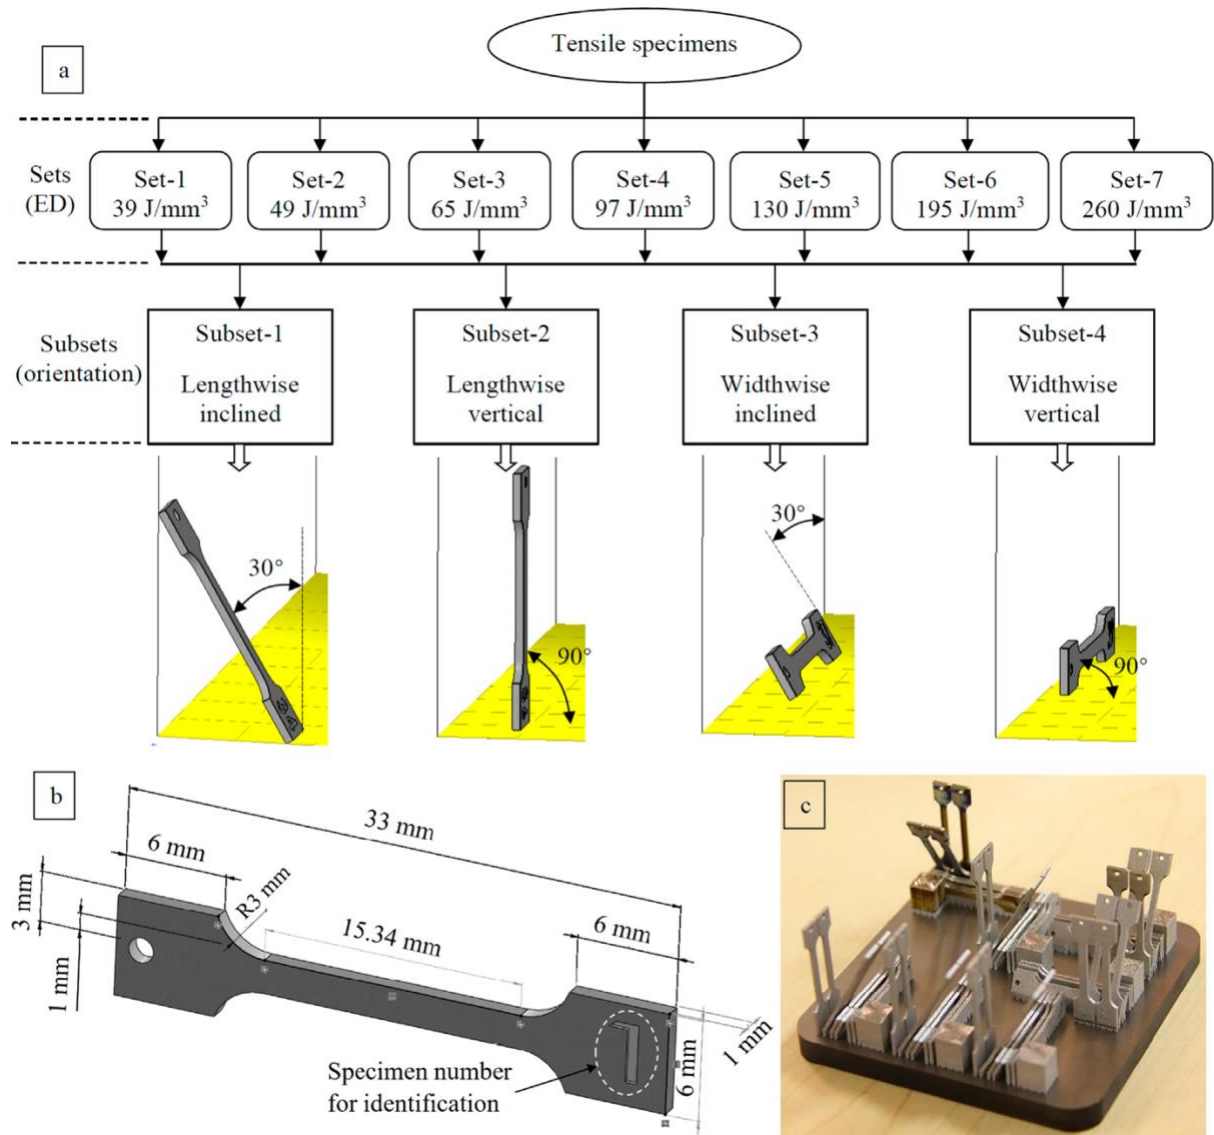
Tensile specimens fabricated by the Selective Laser Melting with different EDs and building orientations (a) fabrication setup of the tensile specimens; (b) dimensions of the tensile specimens; (c) photograph of fabricated tensile specimens
